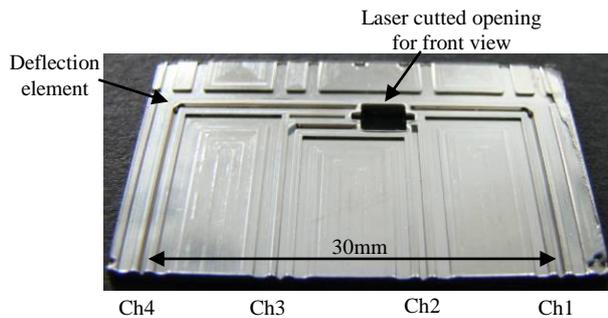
Aluminum coated PMMA lightpipes with an opening for frontal vision function fabricated by laser cutting
